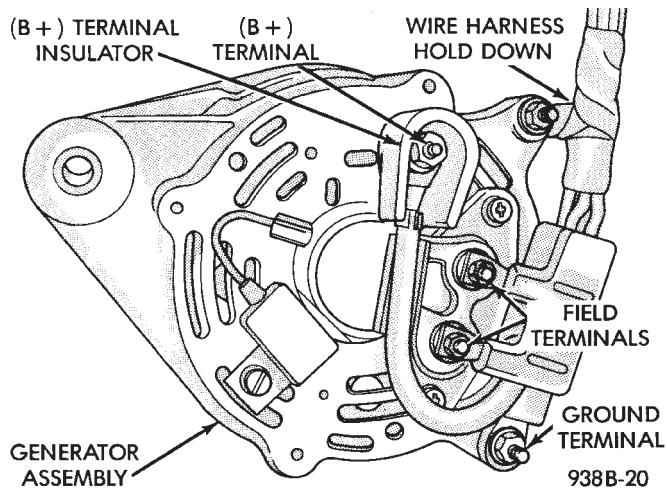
Remove or Install Wire Connector Assembly—Bosch Generator
